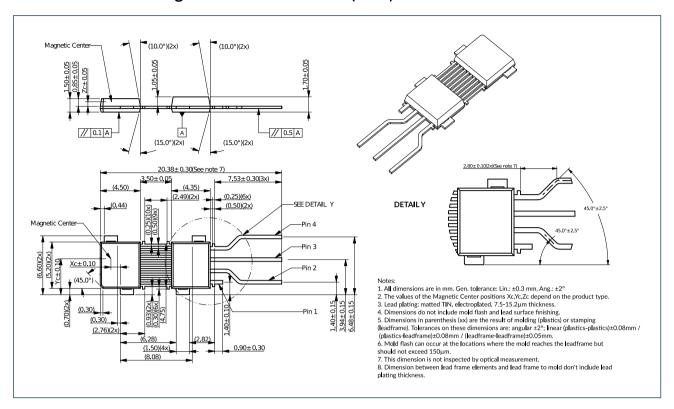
DMP-4 - Package Outline Dimensions (POD) - STD4 2.54
